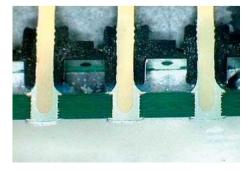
Assessment of the fill level for 1.4 mm pin in a 1.6 mm thick PCB
